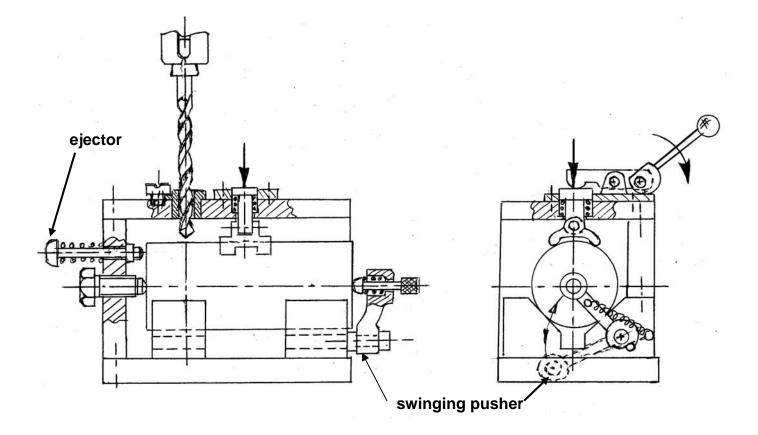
(f) complete jig with assured locating and ejection
